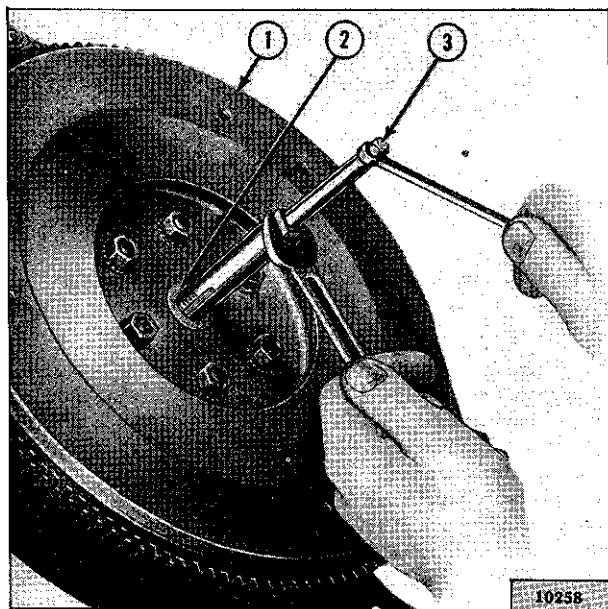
REMOVING PILOT BUSHING FROM FLYWHEEL
